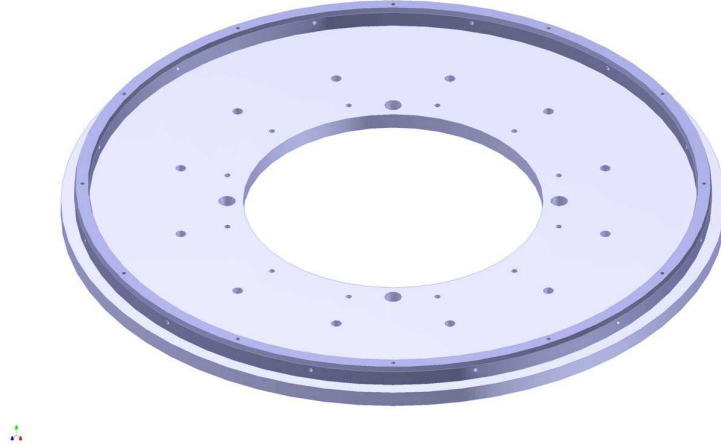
Bottom plate with locating ring for the lead shield (stand not shown).
